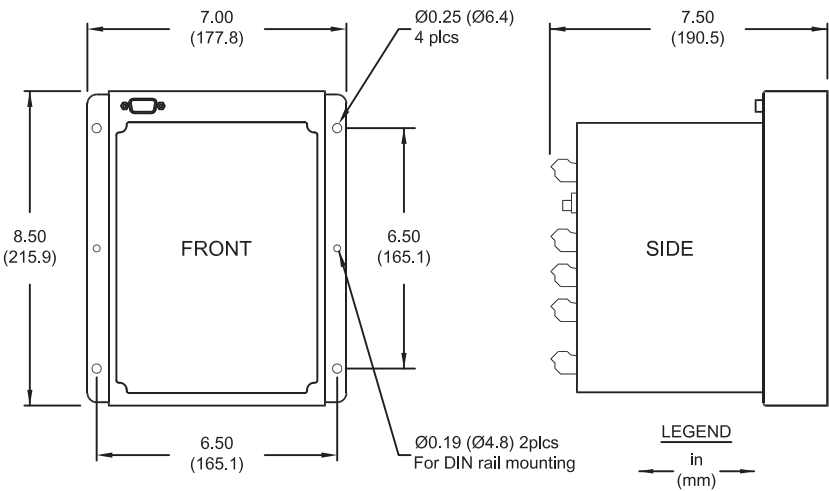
Programmable Automation Controller Surface-Mount Dimensions
